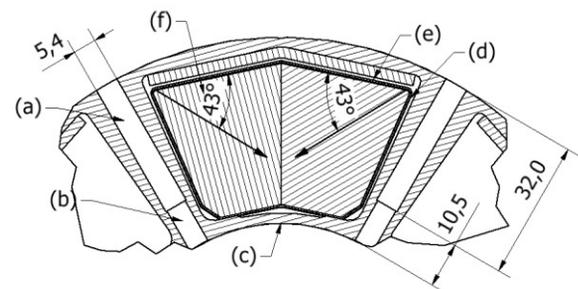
A through cut of a section of the aluminium hexapole container including the canned magnet bar, (a) pumping ports, (b) pumping holes, (c) loss-lines, (d) space filled with SS sheets, (e) can, (f) easy axis.
